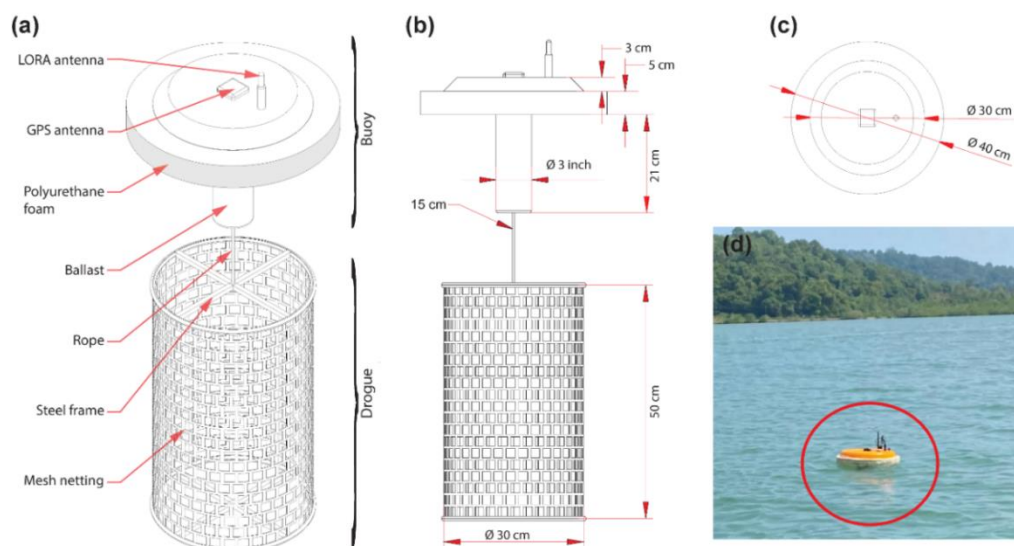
Physical design and implementation of the drifting buoy, (a) exploded view illustrating the main components, (b) side view with detailed dimensions, (c) top view showing the diameters, and (d) actual photograph of the drifting buoy floating during field deployment.
